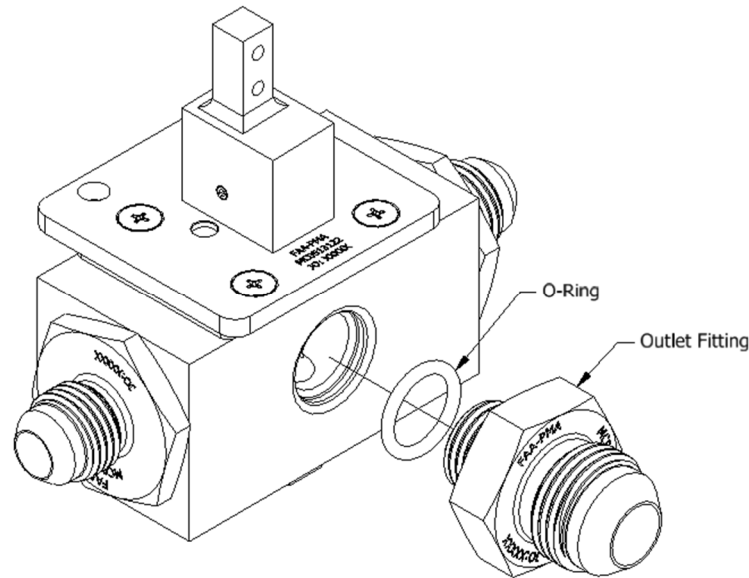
MC0513120 series Fuel Selector Valve w/ Outlet Fitting and O-ring
